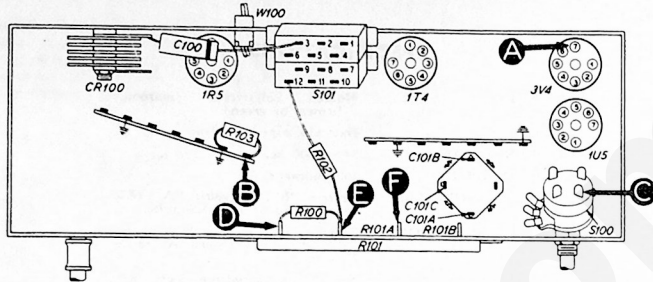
Bottom View, Showing Section 1 Test Points TP-5355A-1
